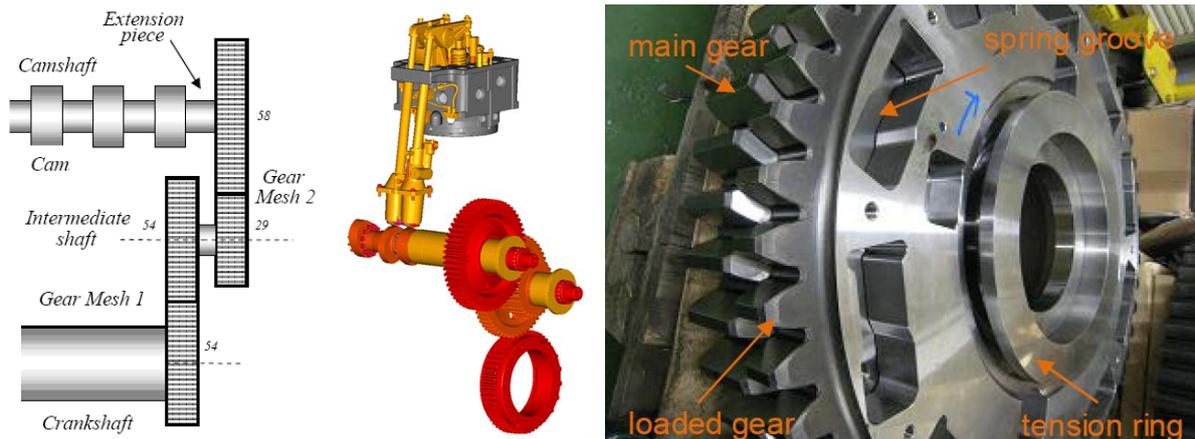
Left, schematic picture of the gear train system; Middle, W32 gear train model; Right, two parts of the anti-backlash large intermediate shaft gear.
